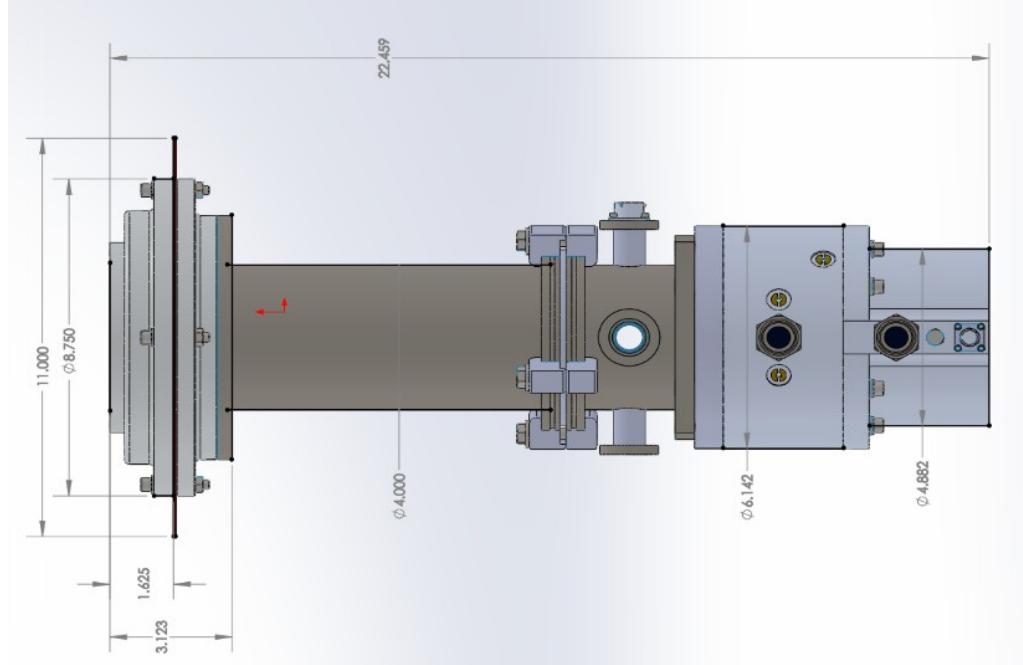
Diagram of the vacuum chamber and the cold head[10].
